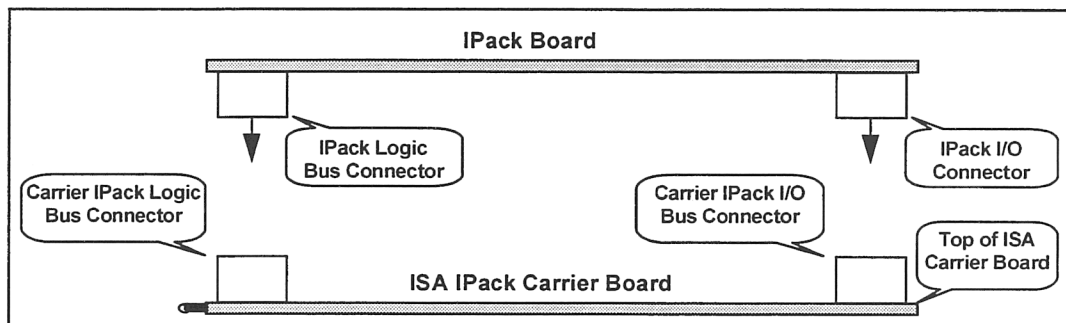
Installation of the DID48 on an ISA IPack carrier board.
